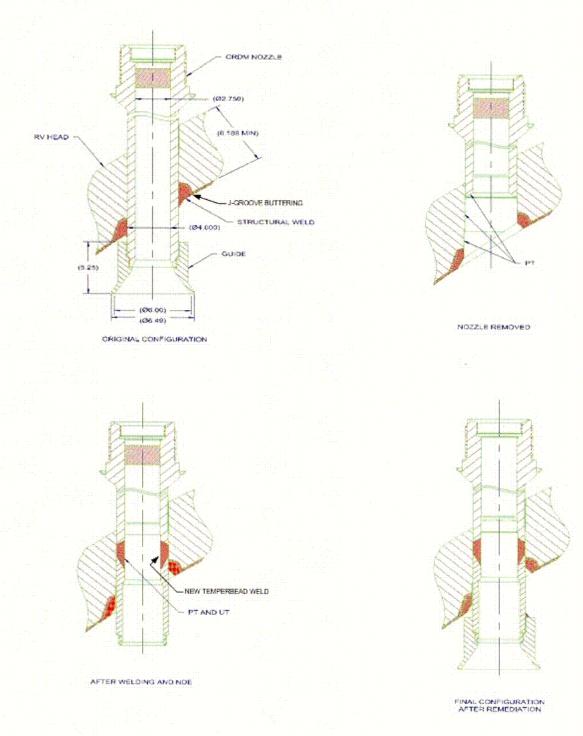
, RVCH Thermocouple Penetration Nozzle Original Weld Configuration and Repair Details
